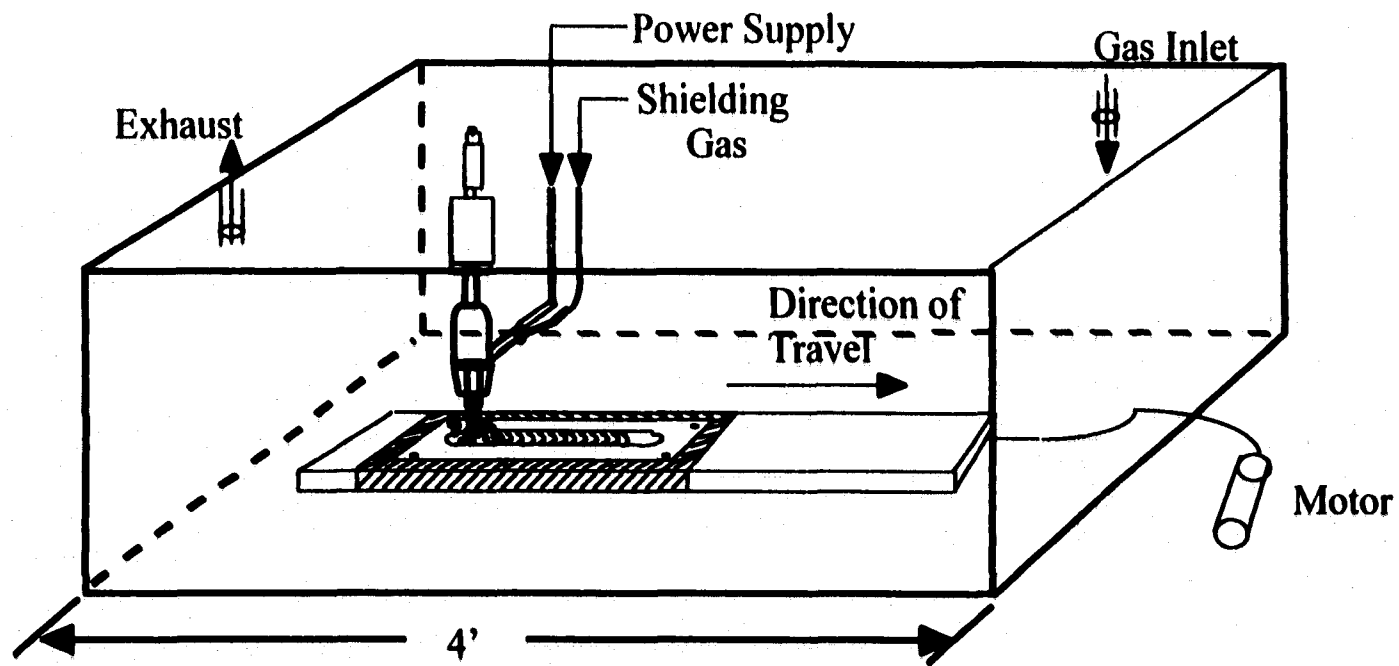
Schematic diagram of experimental chamber used for controlled GTA welding experiments.
